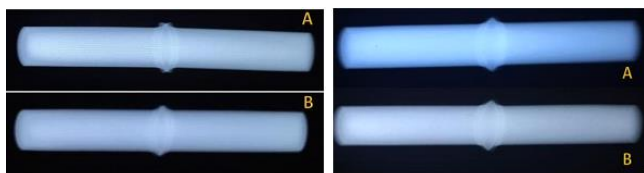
, 8.2. X-ray inspection, workpieces 1, 2, sides A, B.
